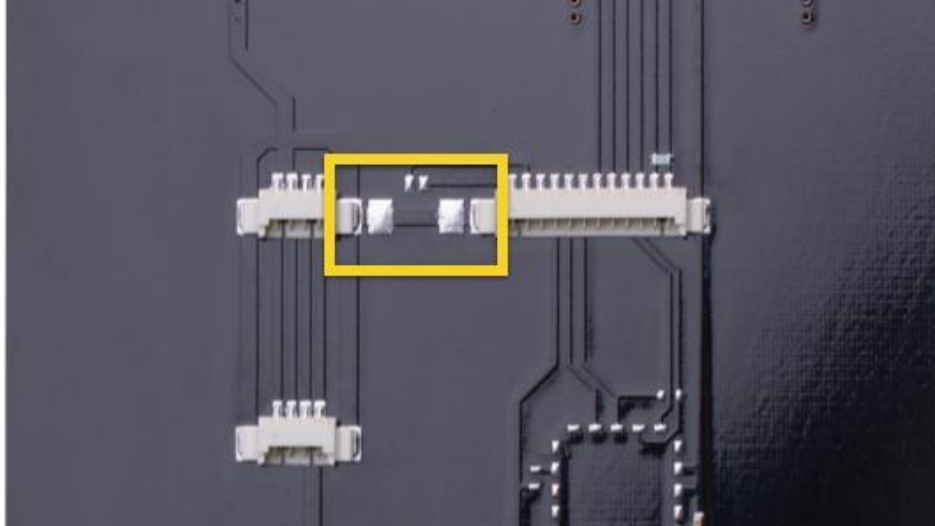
Solar Panel - Bottom Side (location of pads for the external magnetorquer connector)
